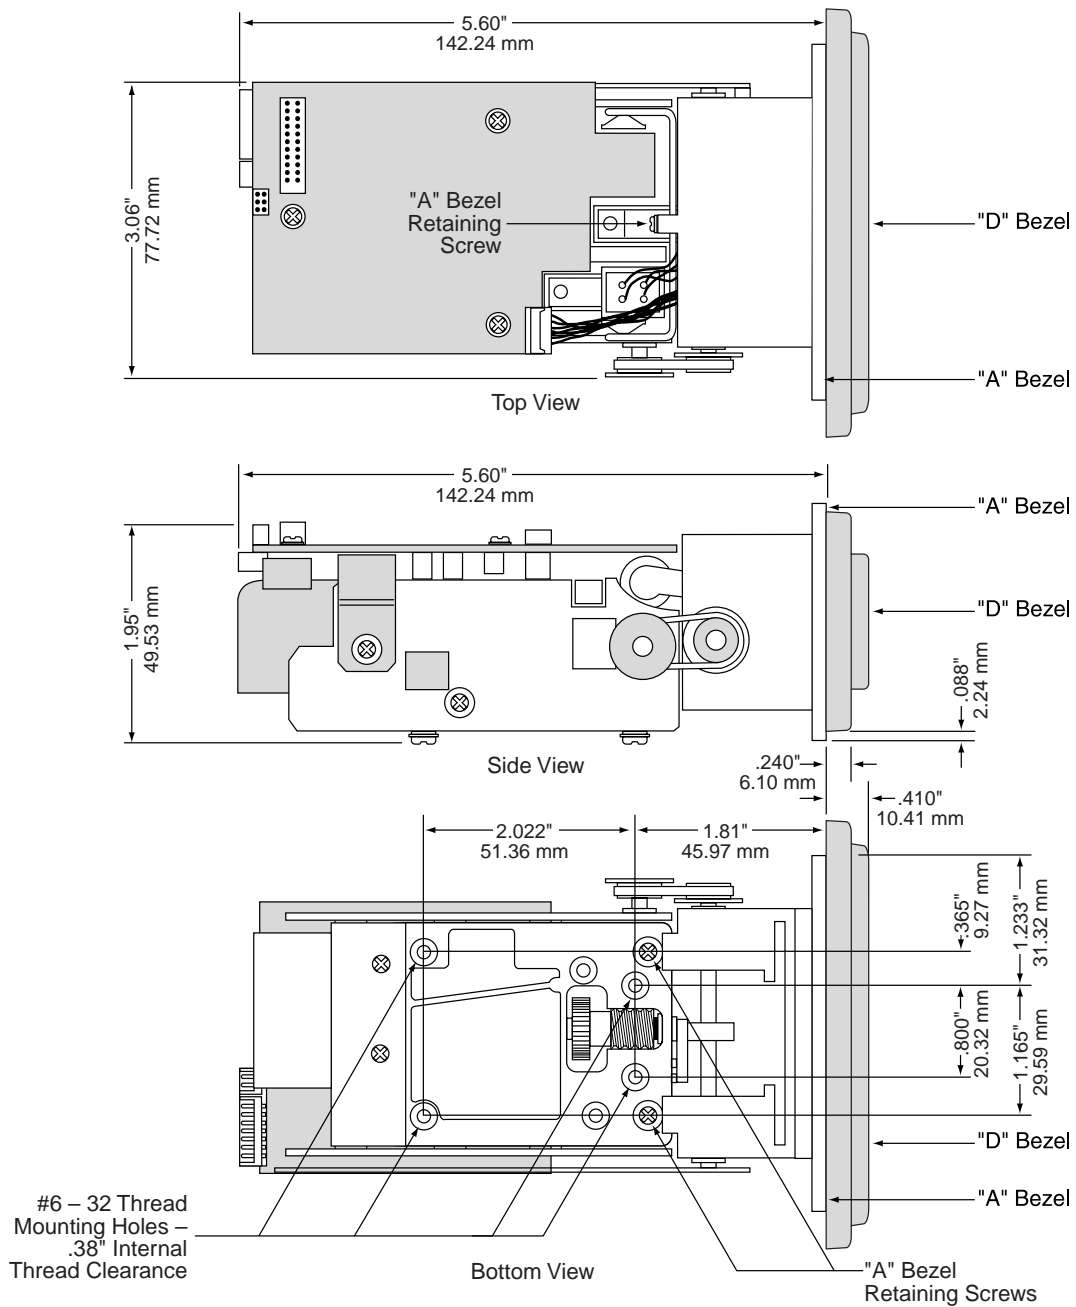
“D” Bezel Mounting – Top, Side, and Bottom Views
